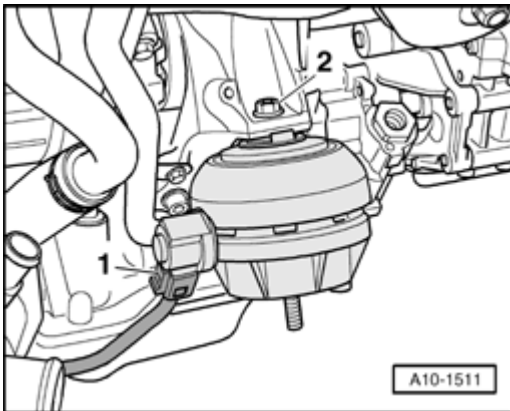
Disconnecting Electrical Connector, Removing Nut And Engine Mount
